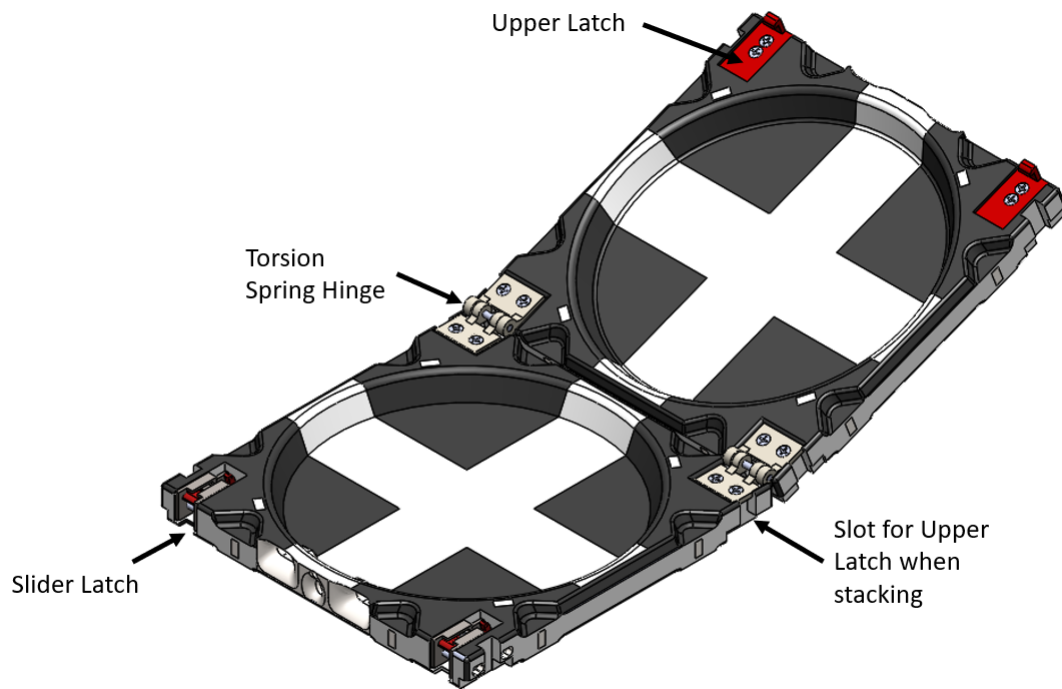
This figure shows the expandable brick assembly of half bricks, elastic latches, and torsion spring hinge.
